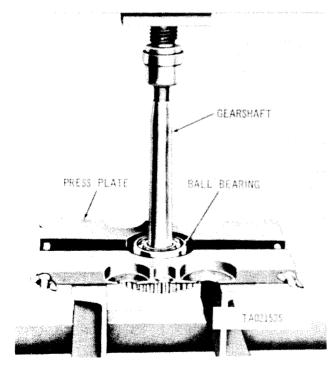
Removing fuel injection pump gearshaft ball bearing
